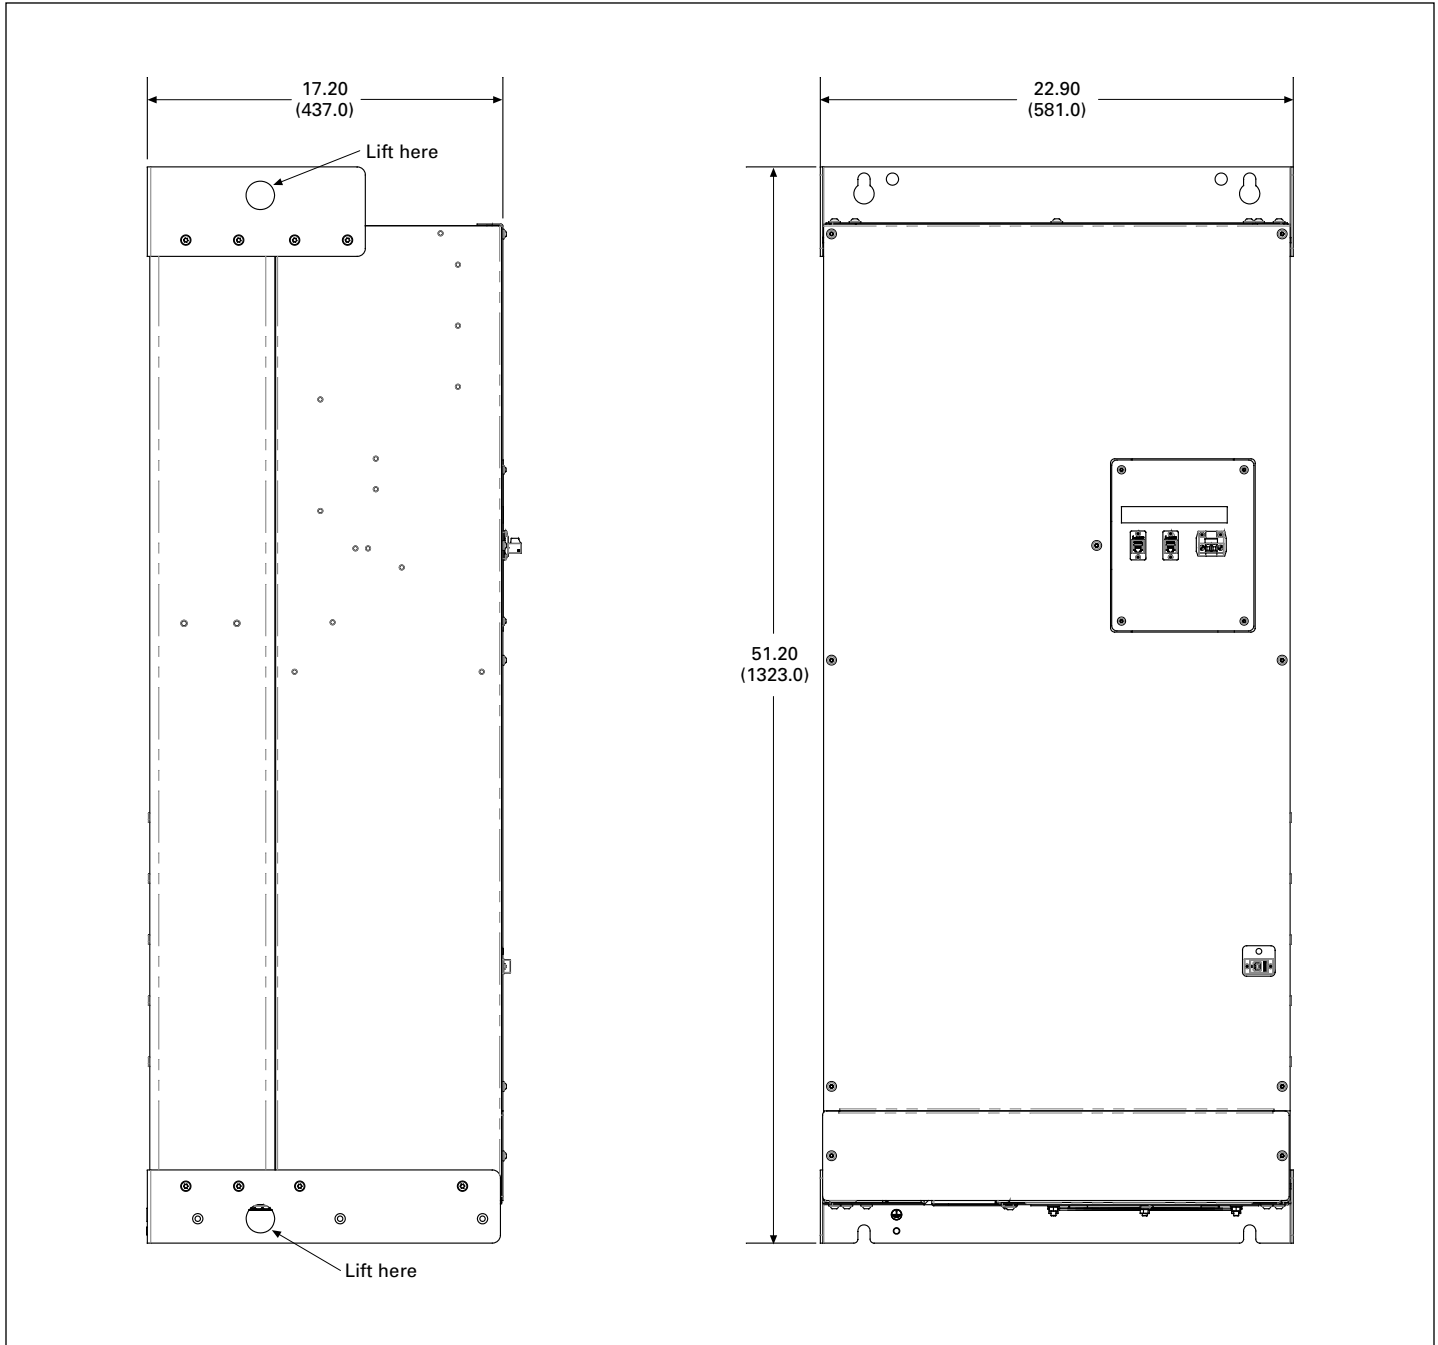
Chassis mount 200 A—dimensions in inches (mm)
